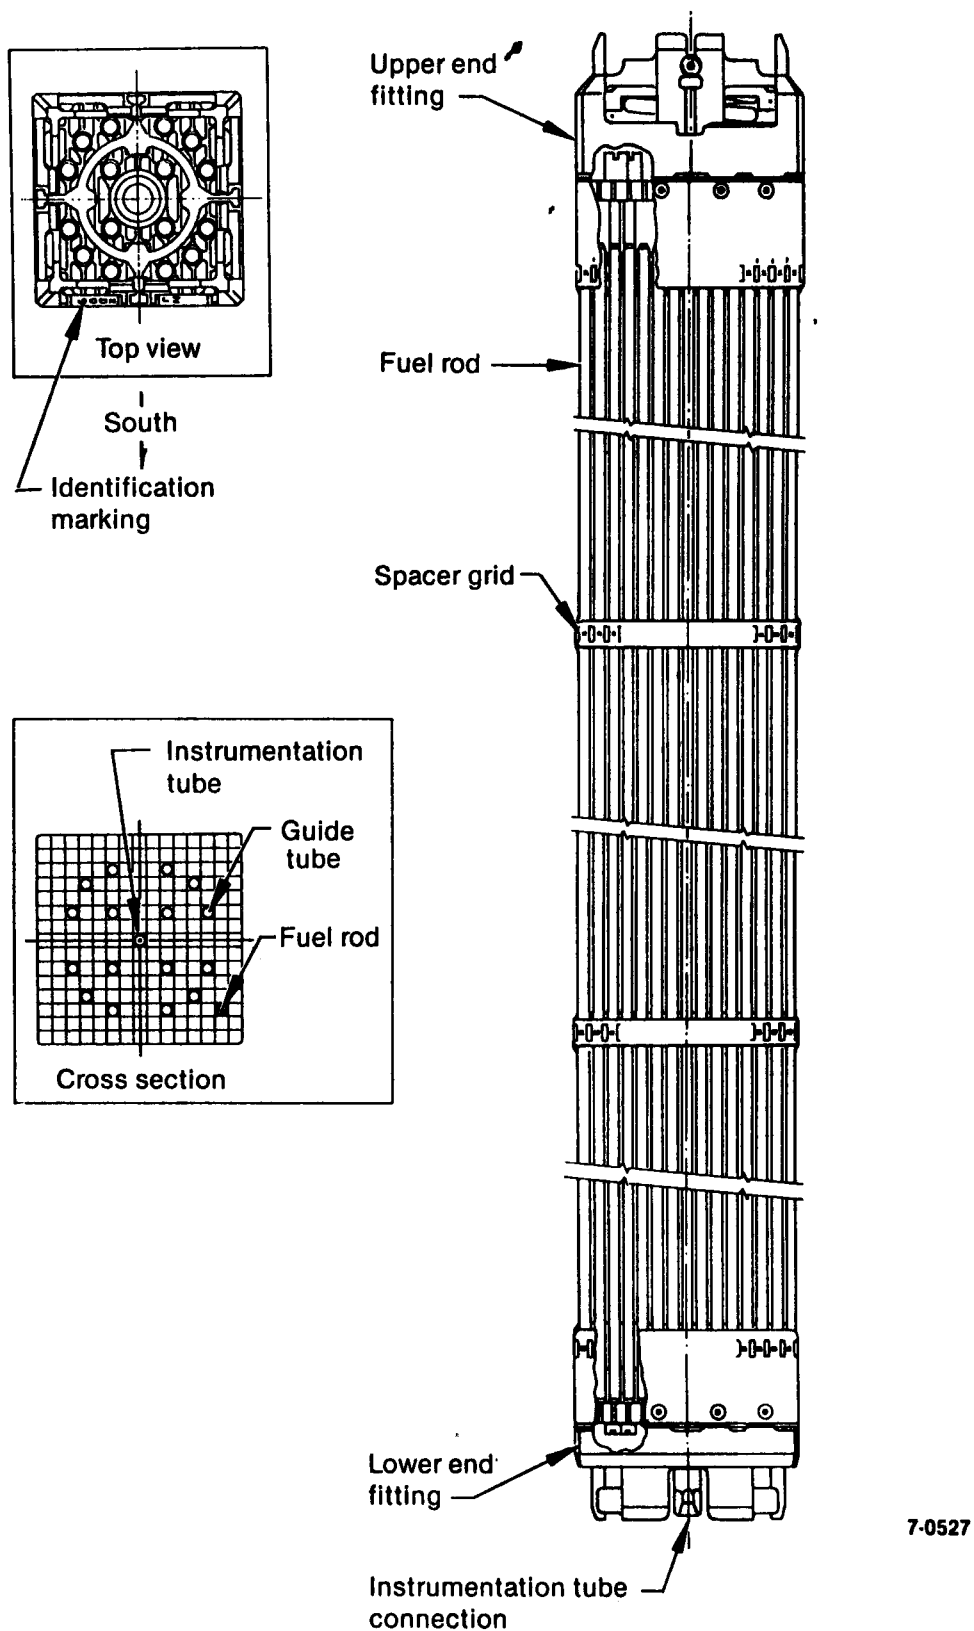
Side, top, and cross-sectional views of TMI-2 fuel assembly (from Reference 6).
